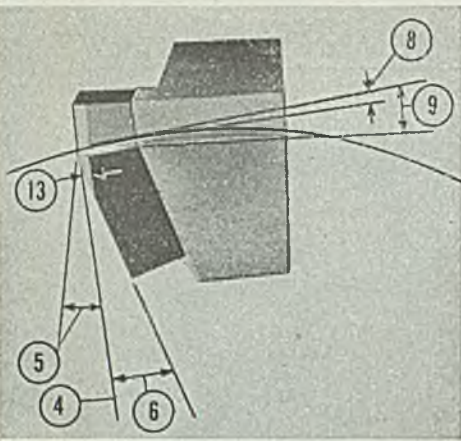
Approved nomenclature applied to the cutting edges on face milling cutters
